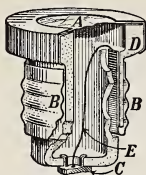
Ordinary screw plug fuse. A, mica; B, screw contact; C, tip screw contact; D, porcelain insulator; E, fuse wire.
